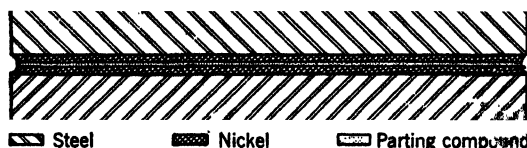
Section Showing Arrangement of Metals before Rolling Nickel-Clad Plates.
